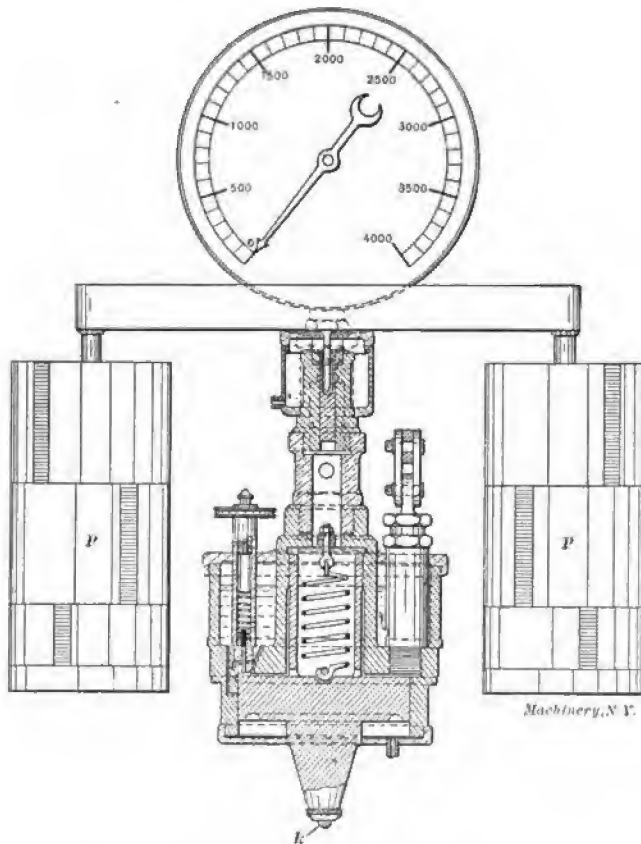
Section of Press Cylinder of Machine in Fig. 12.
